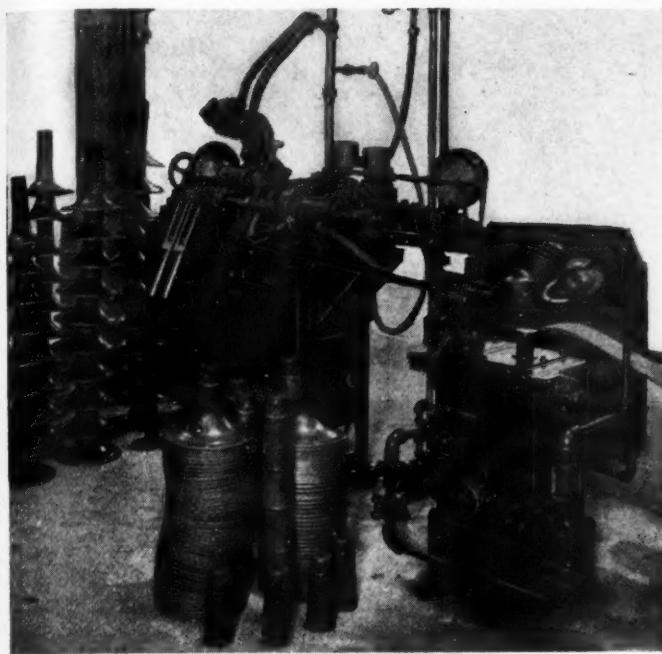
Thomson Model 15 automatic butt welder
